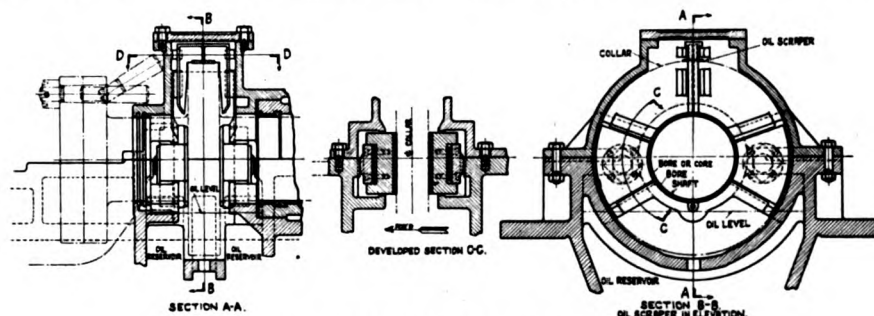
Section of the thrust-bearing shown in Fig. 1
